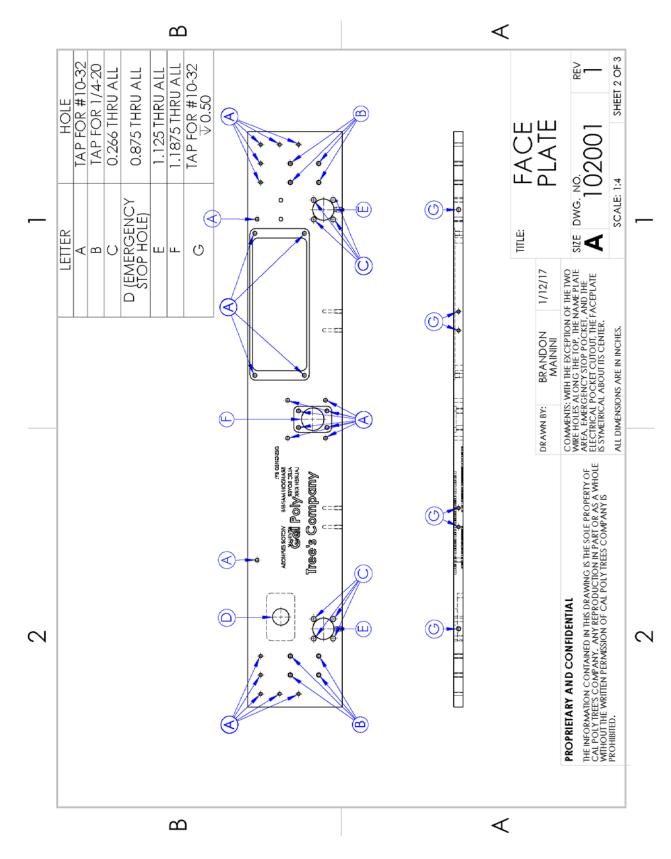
Face Plate Detail Drawing Sheet 2 of 3
